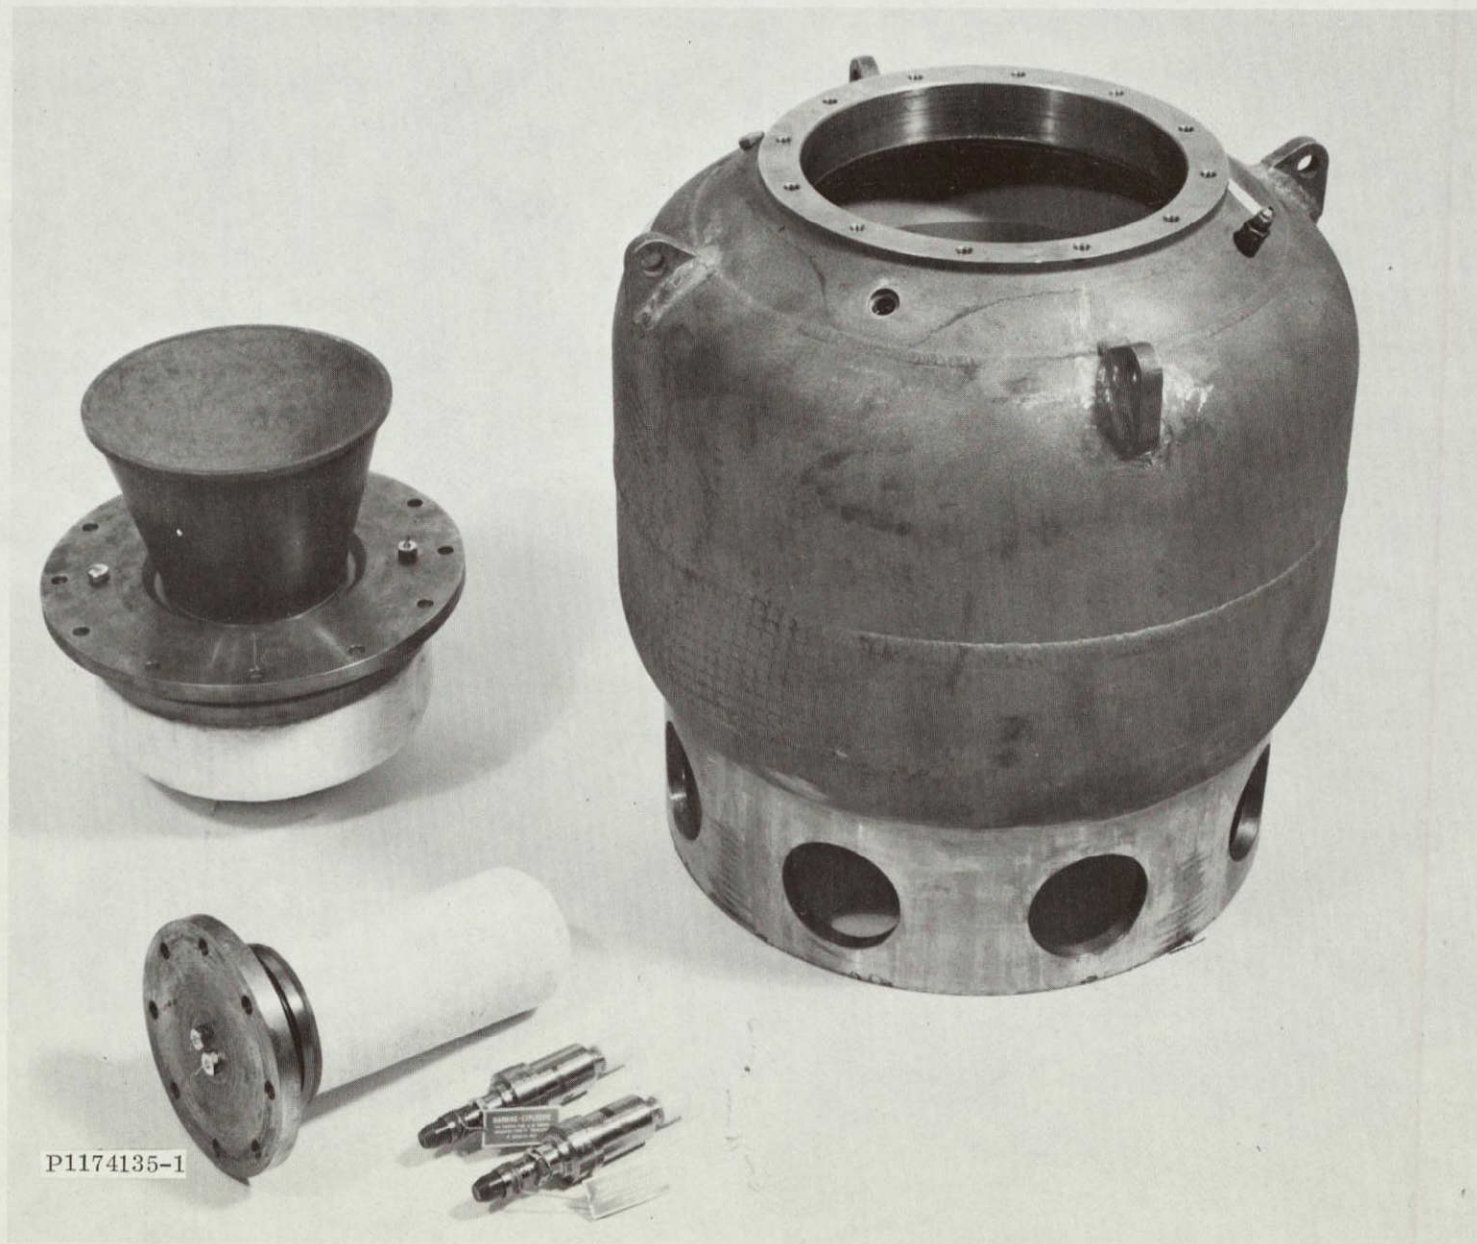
18-INCH-DIAMETER TEST MOTOR COMPONENTS
